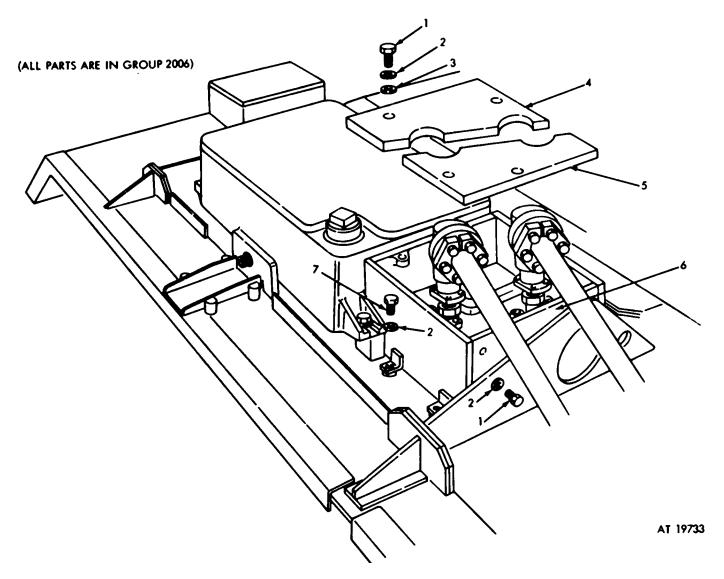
Hydraulic system armor guards (sheet 5 of 5)-partial exploded view.
